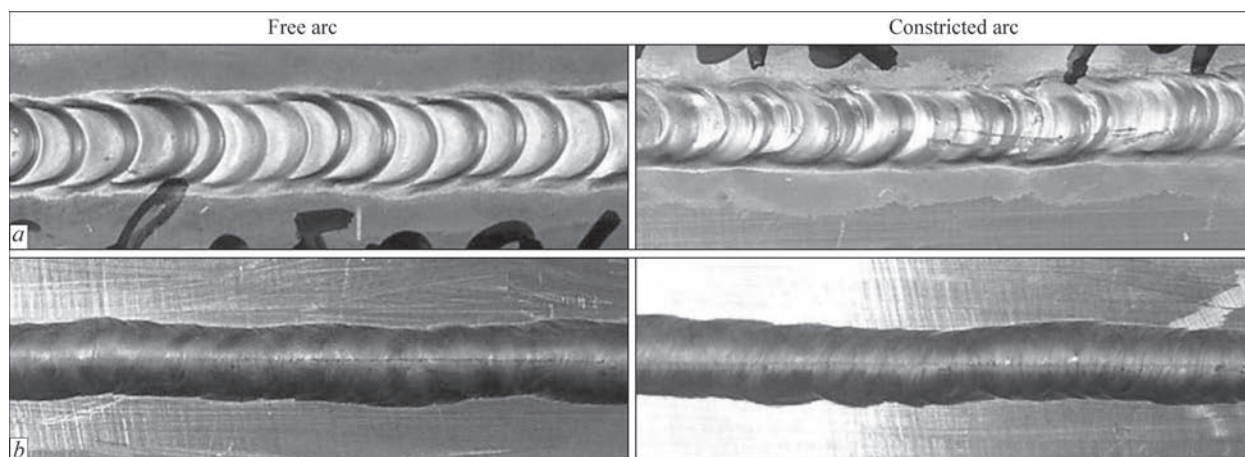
Appearance of as-welded joints: *a* — facial weld surface; *b* — weld root
